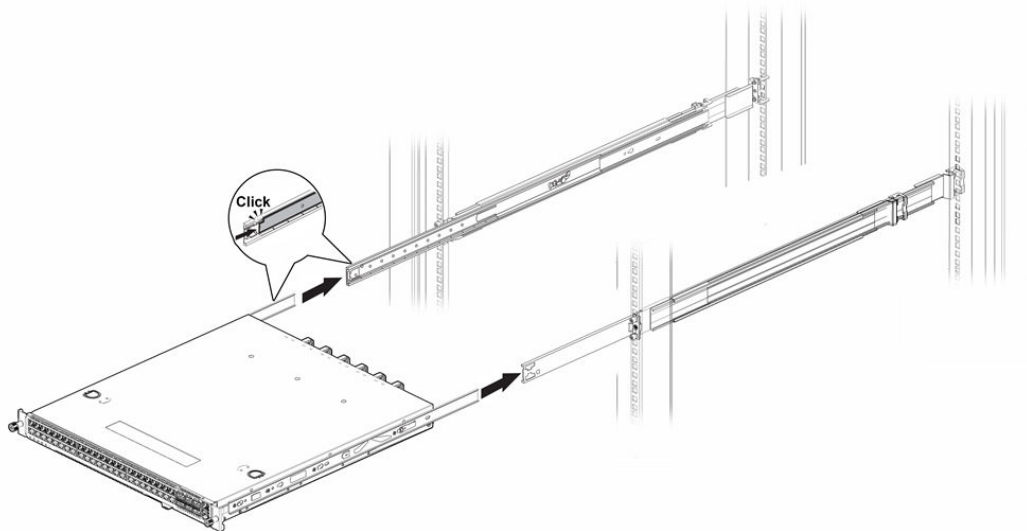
Engaging the Mounting Brackets with the Rail Assemblies
